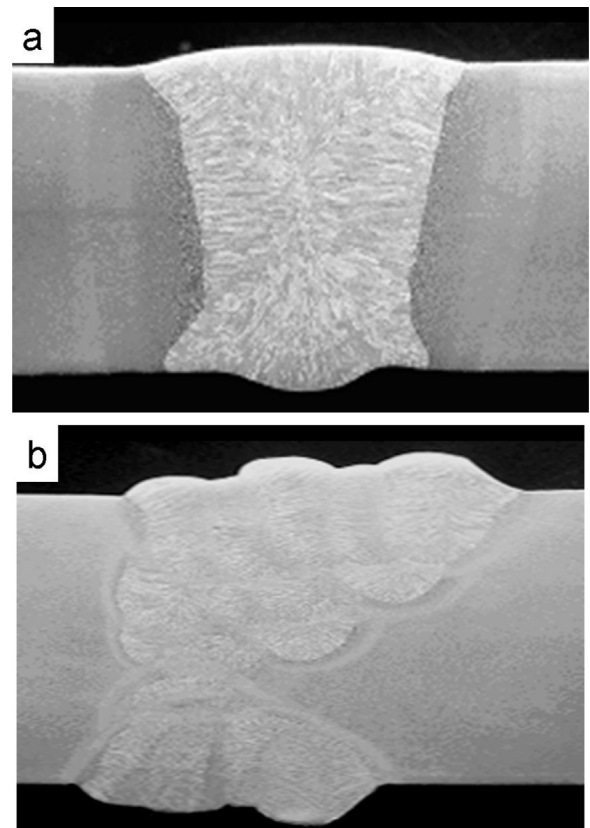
Cross-section macro-images of both the welding technology (a) VEGW joint (b) SAW joint.
